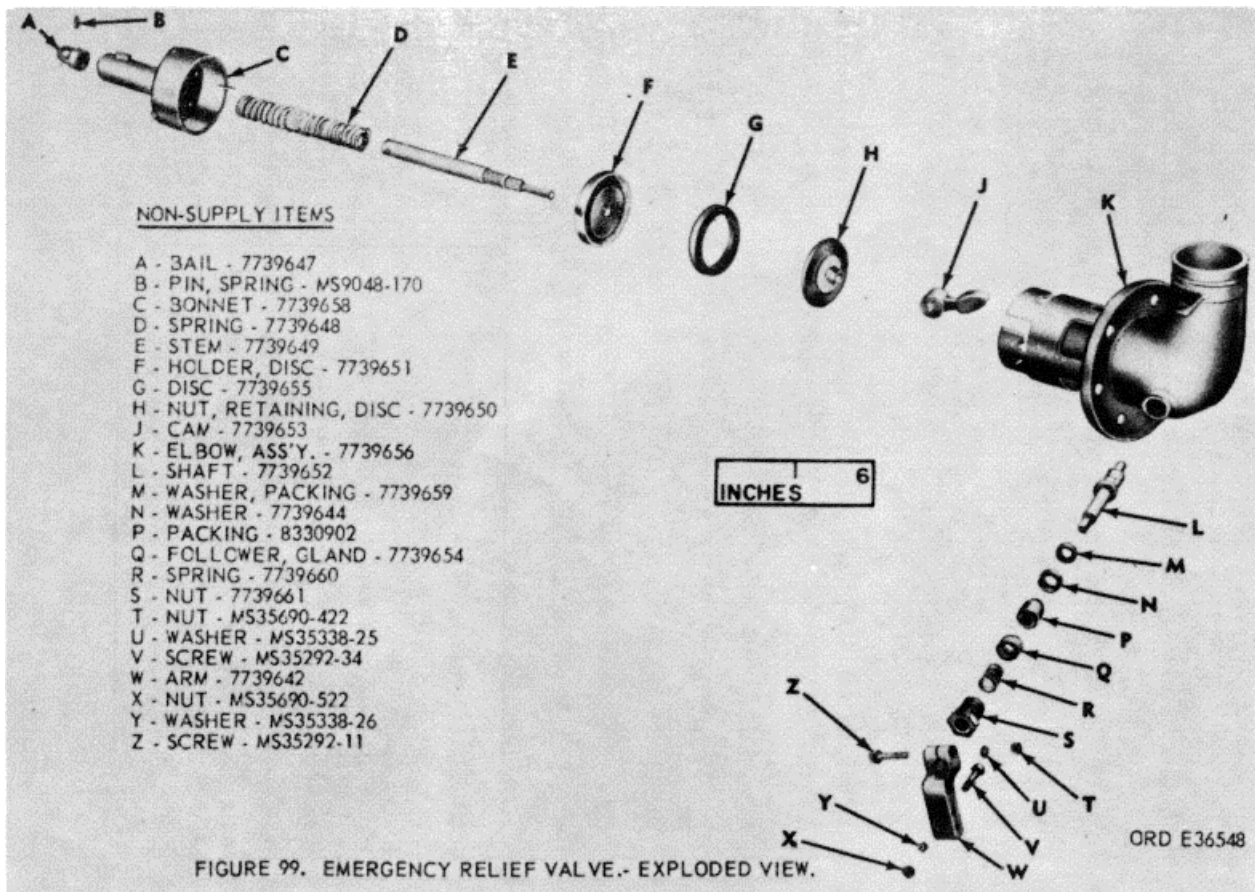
EMERGENCY RELIEF VALVE.- EXPLODED VIEW.
